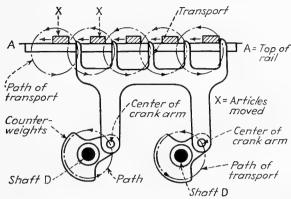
In this design, a rotary action is used. The shafts D rotate in unison and also support the main moving member. The shafts are carried in the frame of the machine and may be connected by either a link motion, a chain and sprocket, or by an intermediate idler gear between two equal gears keyed on the shafts. The rail AA is fixed rigidly on the machine. A pressure or friction plate may be used to hold the material against the top of the rail and prevent any movement during the period of rest.
